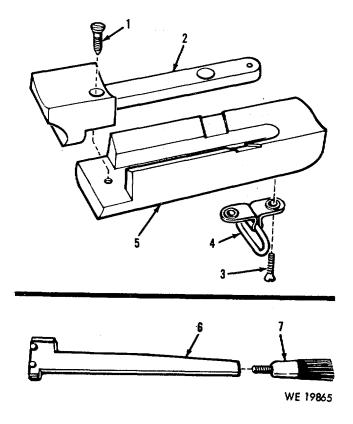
Fore end assembly and screwdriver and wrench combination-exploded view.
